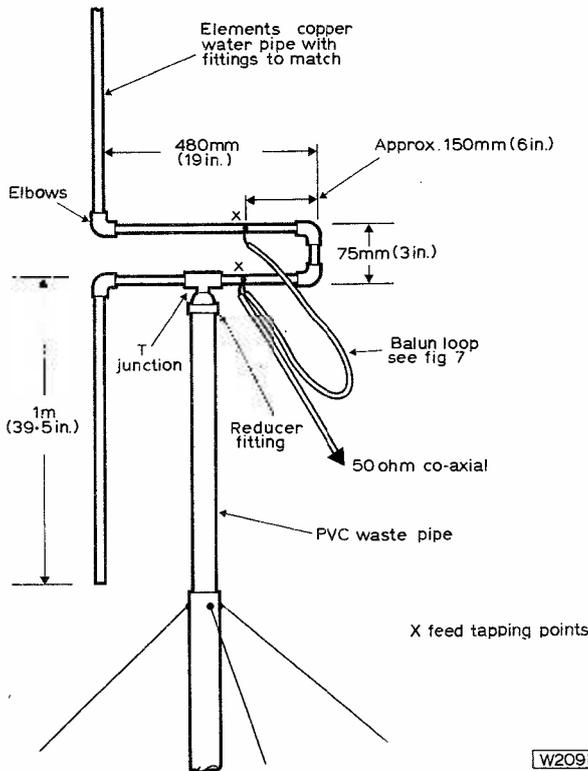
Use of copper water pipe and fittings in constructing a colinear aerial.
